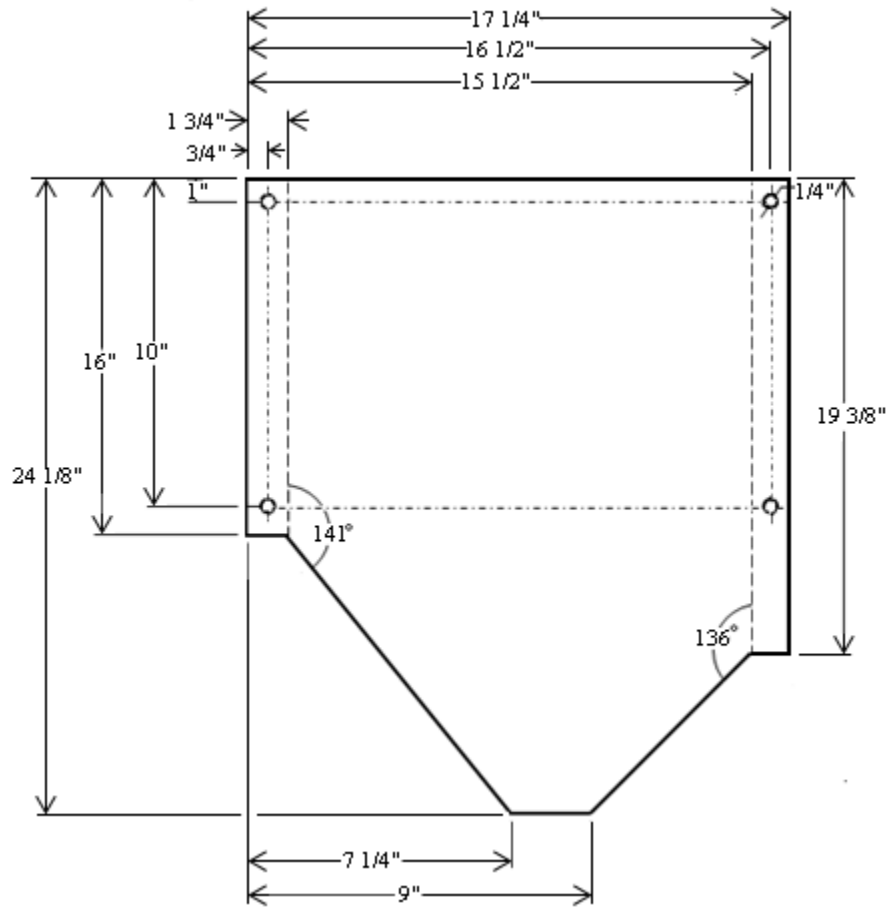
Flat representation of the holding bin's side panels dimensions in inches.
